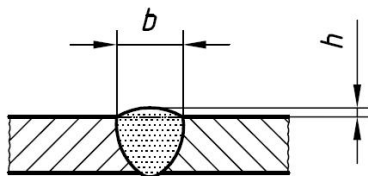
Weld Metal Excess According to EN-ISO 5817 [22]
